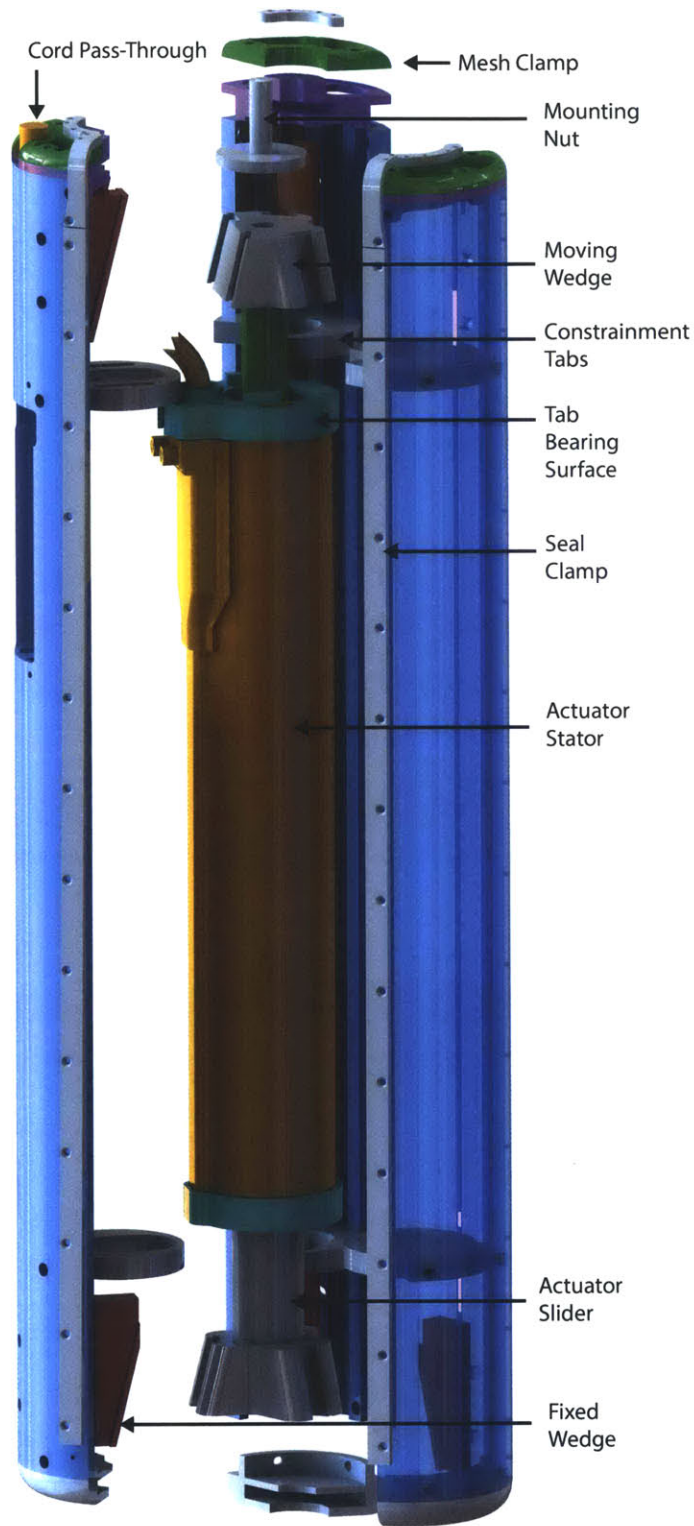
ROBOCLAM 2 EXPLODED VIEW. This figure shows an exploded view of RoboClam 2. The right side shell is rendered transparent so parts can be seen on the back side.
